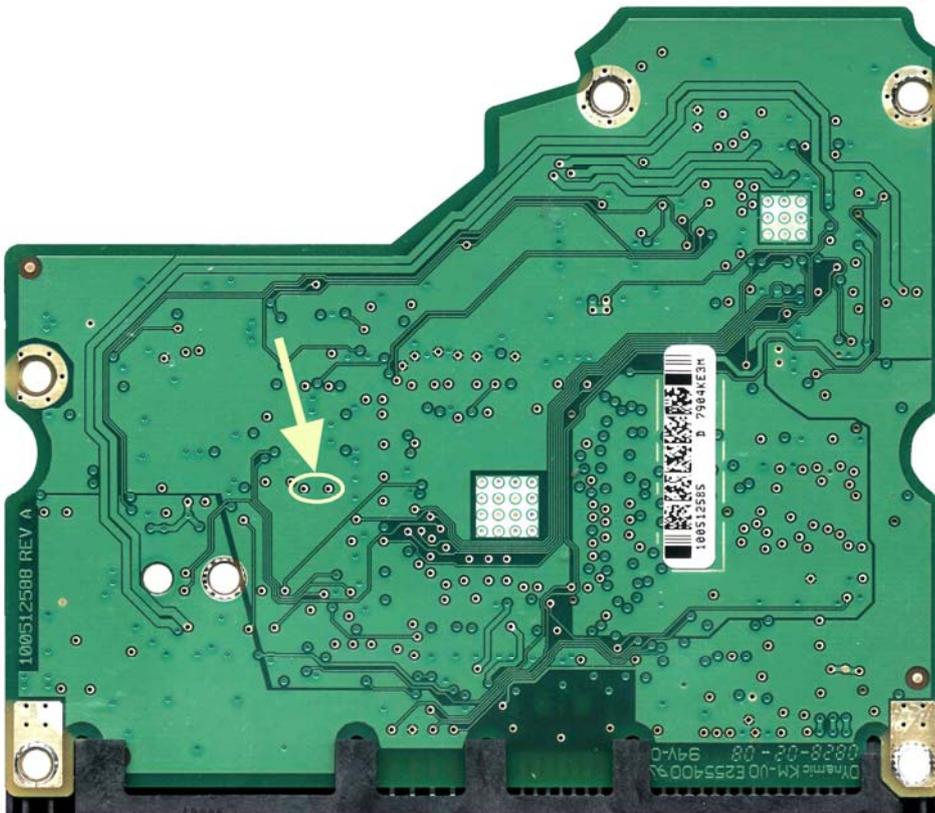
Board view from the external side. Connection points are marked in yellow.
